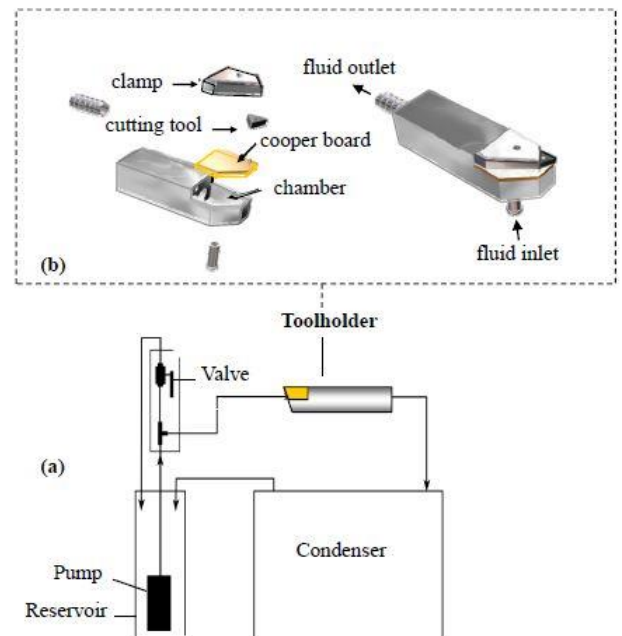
Scheme of the cooling system (a) and tool holder (b) [8]
